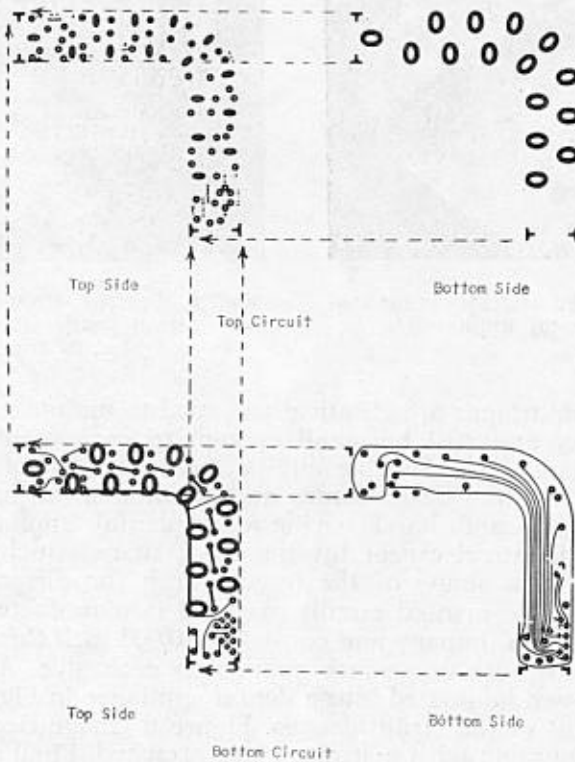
Drawings of the two double sided flexible printed circuits for use with the PAM/FM telemetry system.
